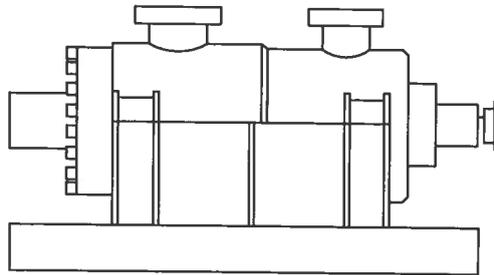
Pump type BB5: Horizontal, radially split, multistage, double casing, between-bearings design
